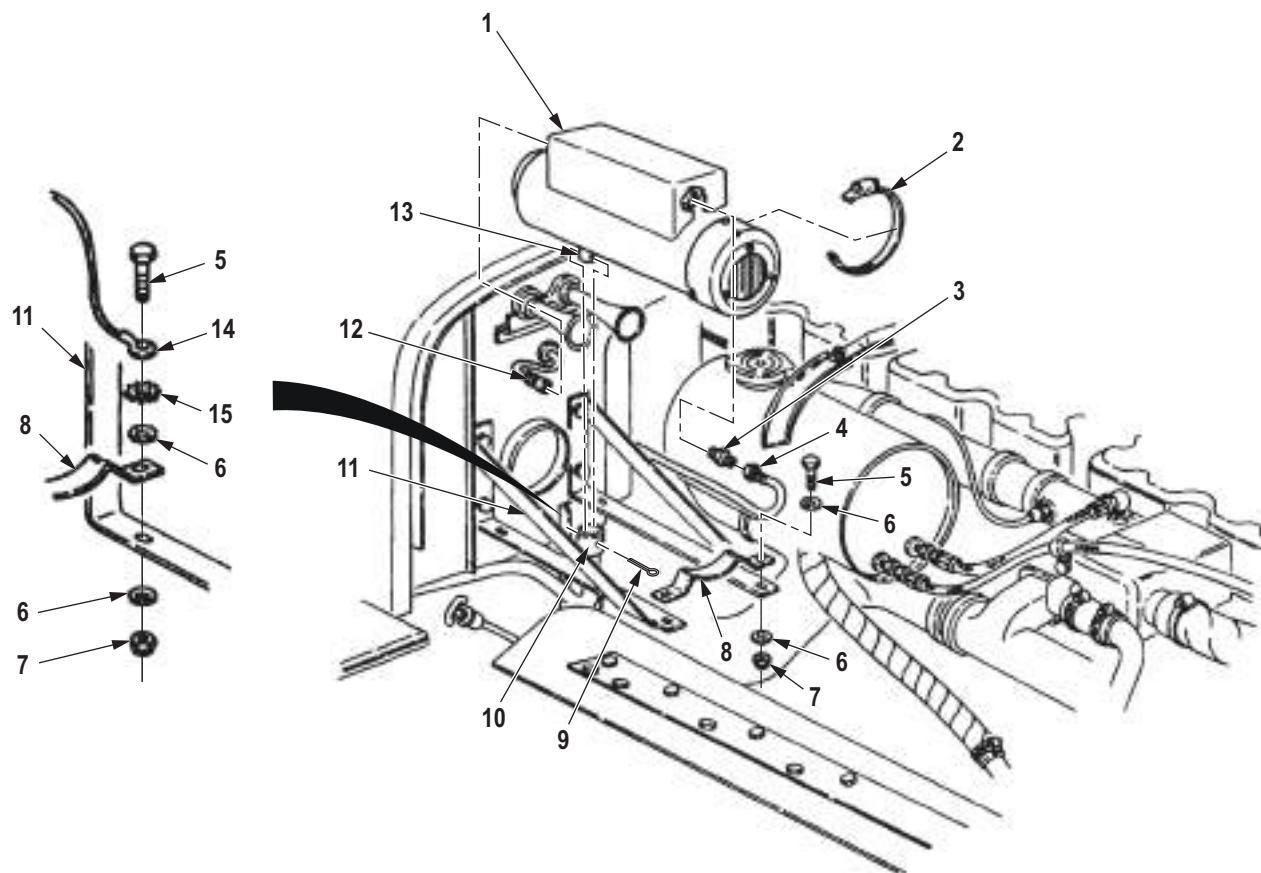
Personnel Fuel Burning Heater and Mounting Brackets Removal.
